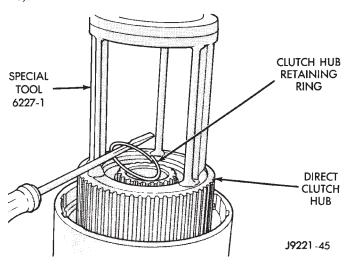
Removing Direct Clutch Hub Retaining Ring
